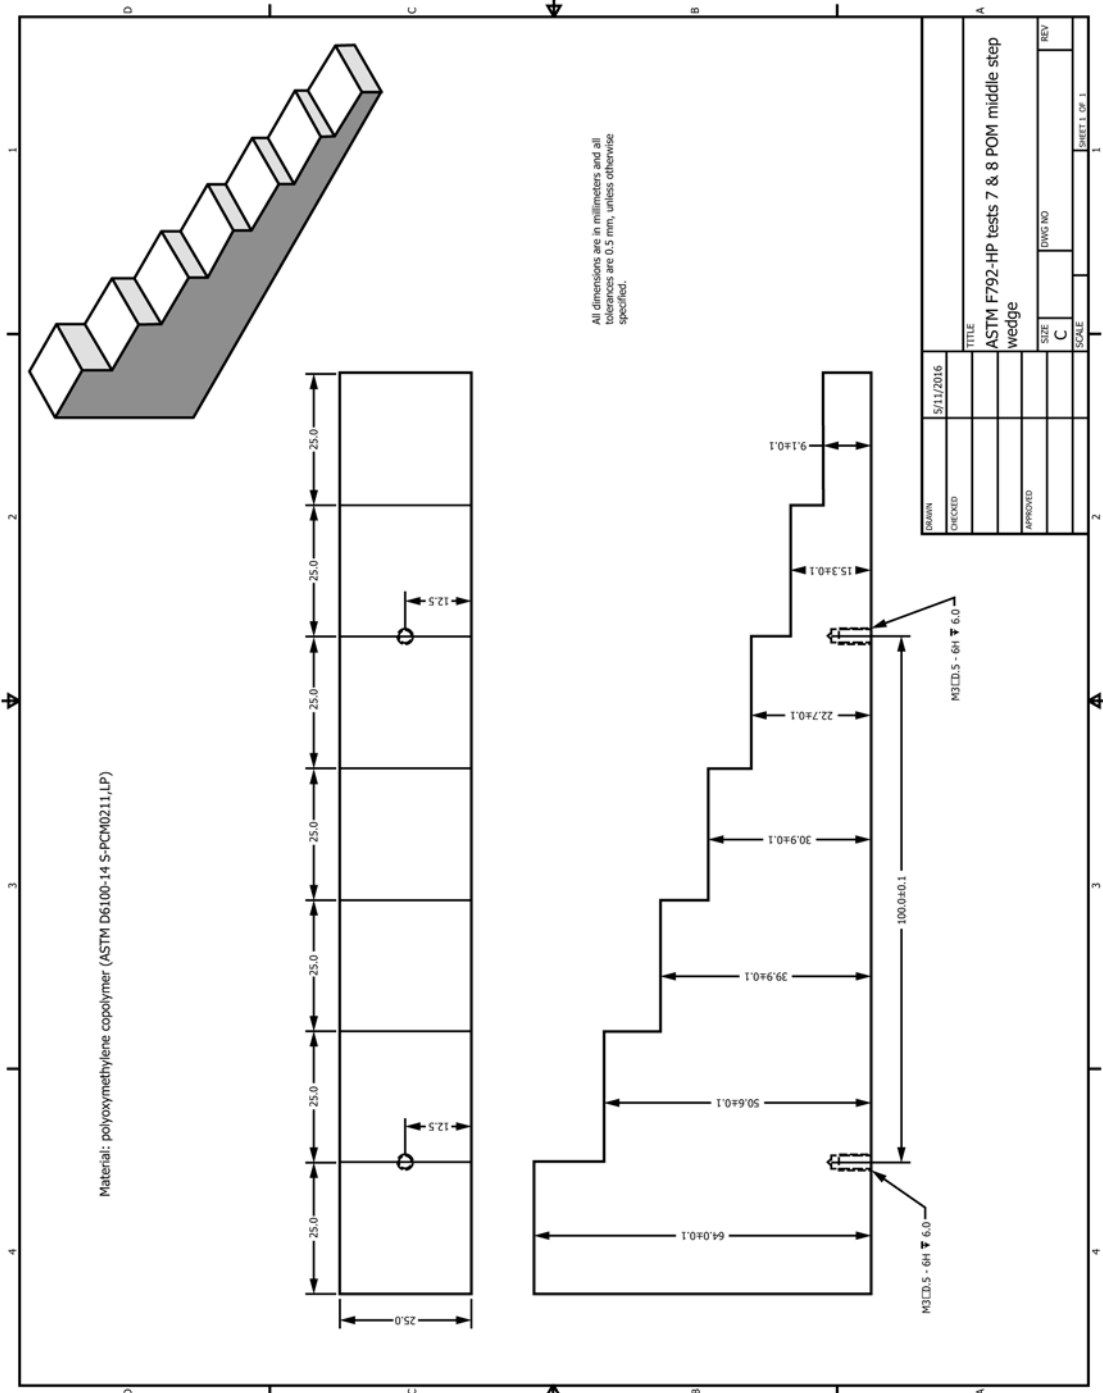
Practice F792 – HP Mechanical Drawing
